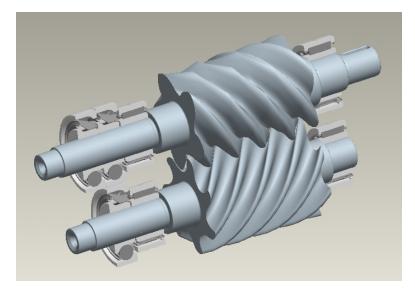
Screw compressor rotors with angular contact ball bearings (thrust load) and needle bearings (radial load)
